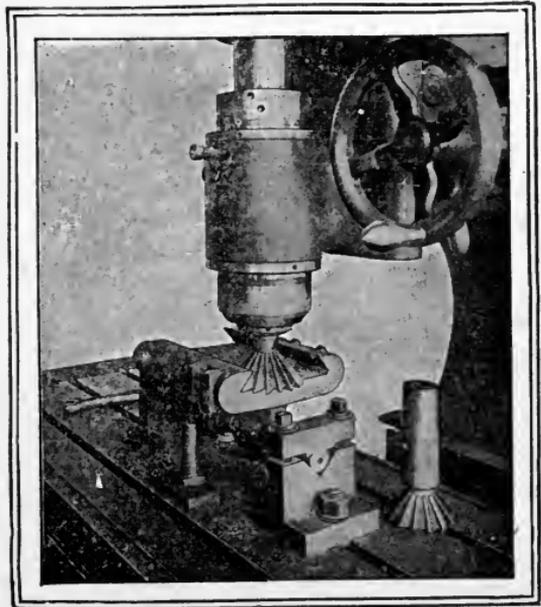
Dovetail Cutter on Vertical Milling Machine
